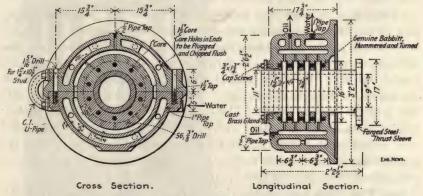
Thrust-Bearing Snoqualmie Wheels.
